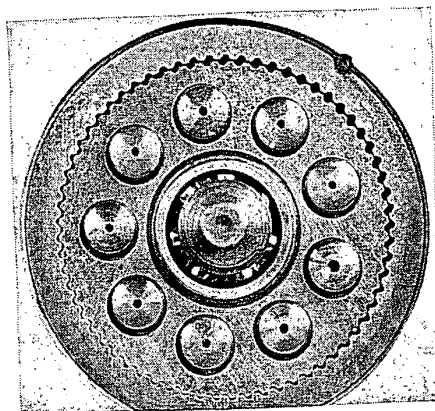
Planocentric gear, 64:1 ratio. High-speed end showing 64-tooth pinion mating with 65-tooth gear. Pinion drives cage pins. (Courtesy of General Electric Co., Lynn, Mass.)
